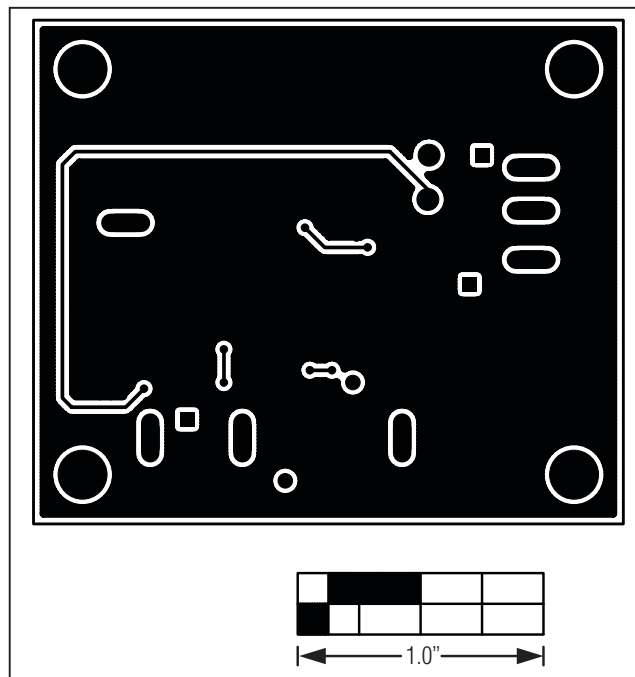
MAX9934T EV Kit PCB Layout—Solder Side
